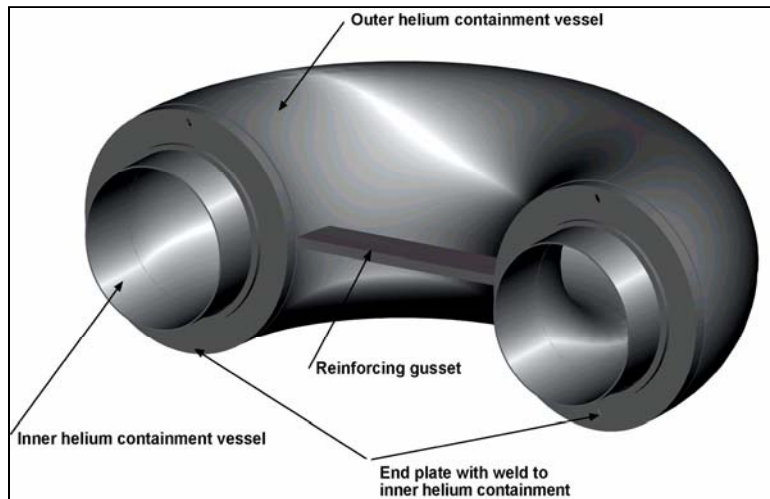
Helium containment configuration with welded end plates at both ends.
